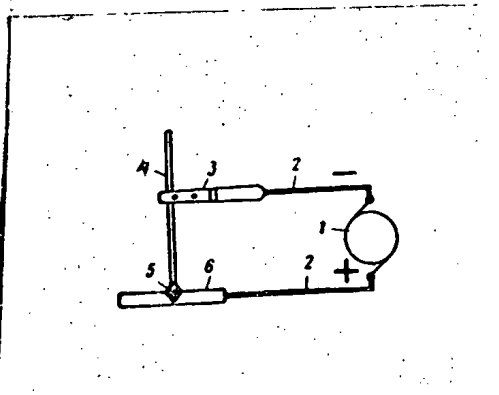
Schematic Diagram of Electric-Arc Welding Circuit.
